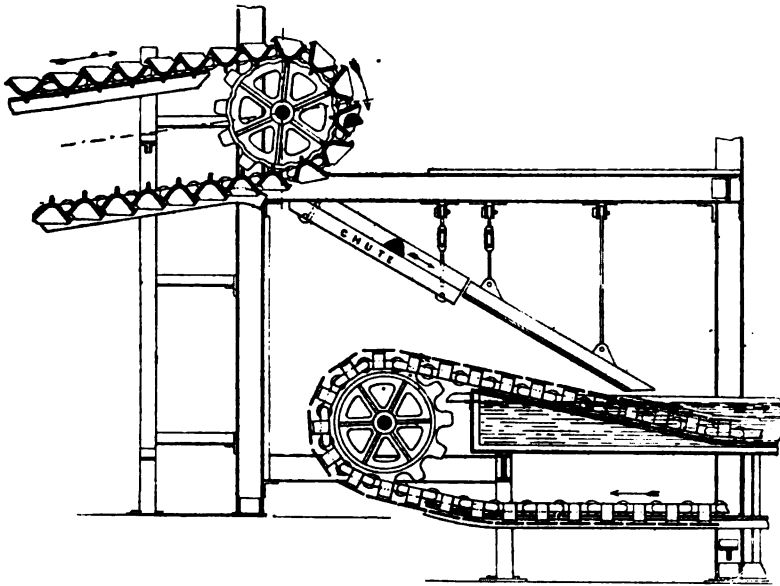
Delivery of the Pigs from Casting to Cooling Conveyor.
